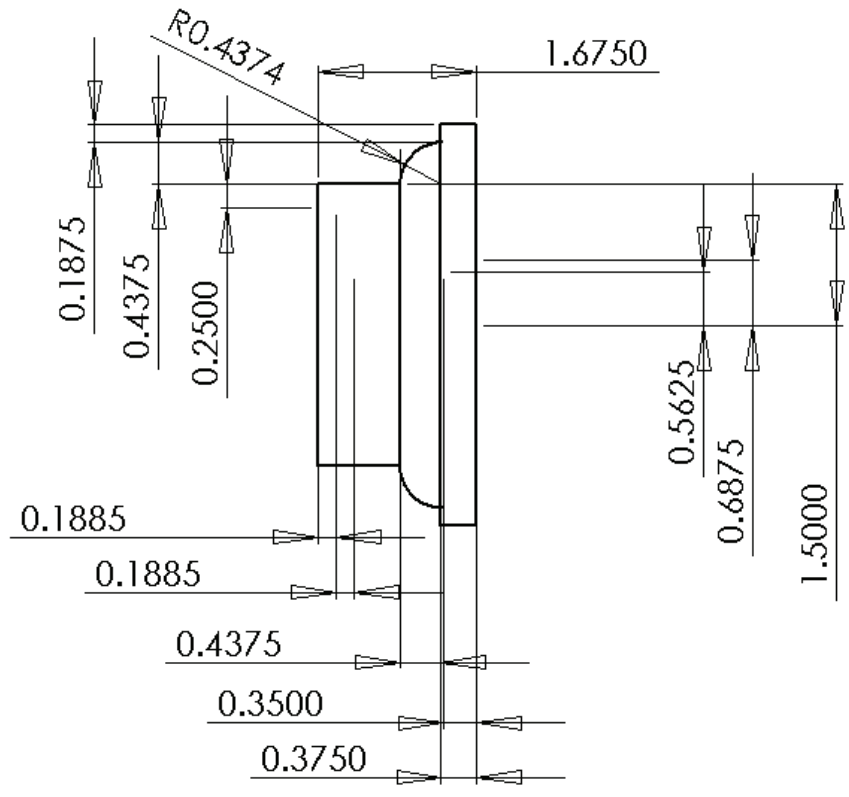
Mechanical drawing of the side view of the part *right dummy hub.sld
